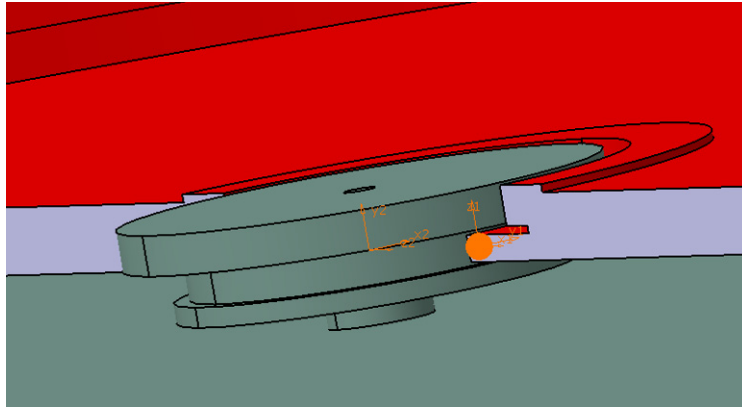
Detail view of hub and cross section of gear. Orange sphere used for contact definition and interacts with the lower surface of the hub.
